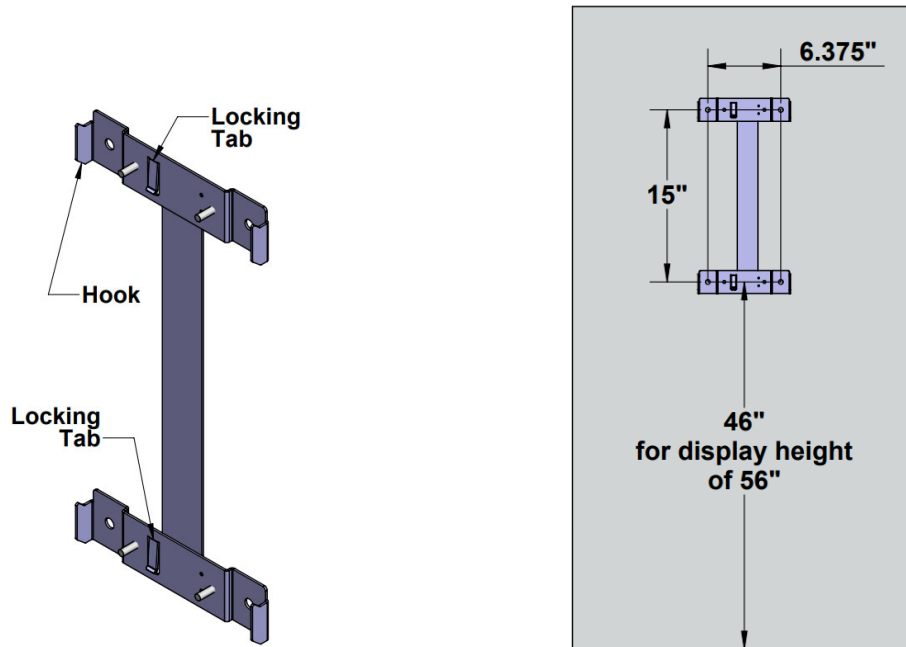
RVX05/RVH05 mounting bracket and mounting height
